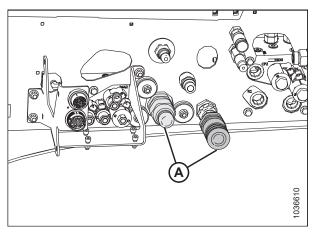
Header Hydraulics Configuration – Rotary Disc-Ready with Quick Couplers
